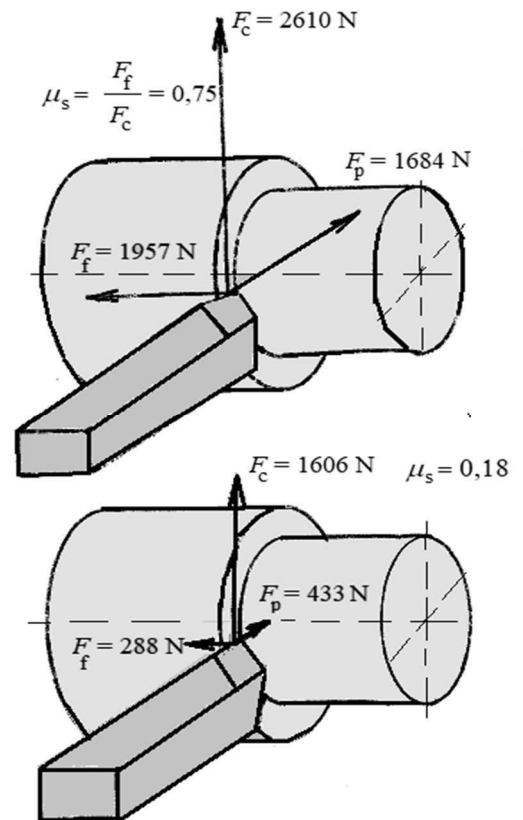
Scheme of measured three elements of cutting forces when machining with classical and adjusted tool
